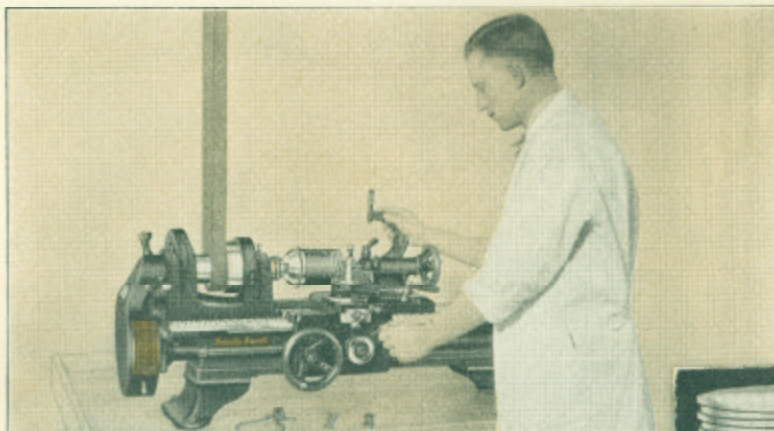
Machining a Piston to Finished Diameter in the 9-inch Lathe
